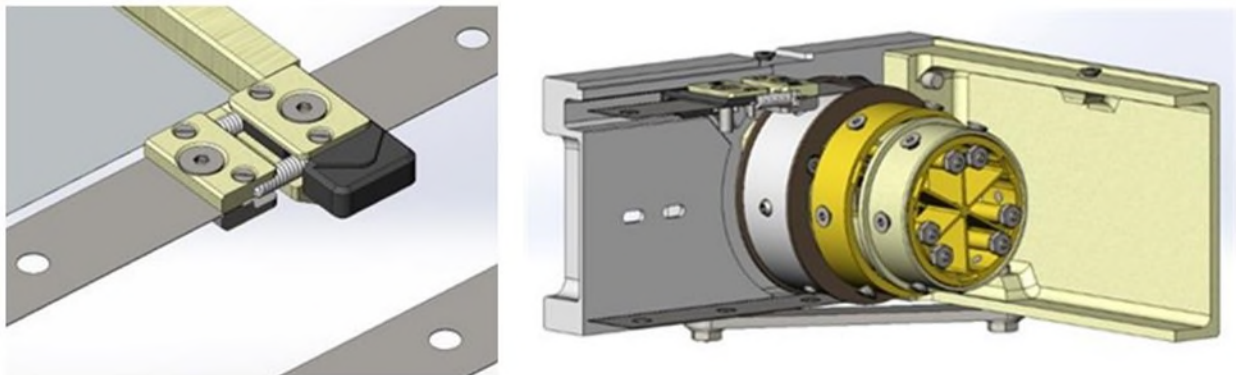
Spreader bar sliders and belt tensioning springs (left) and sprocket/flexure sub-assembly (right)
